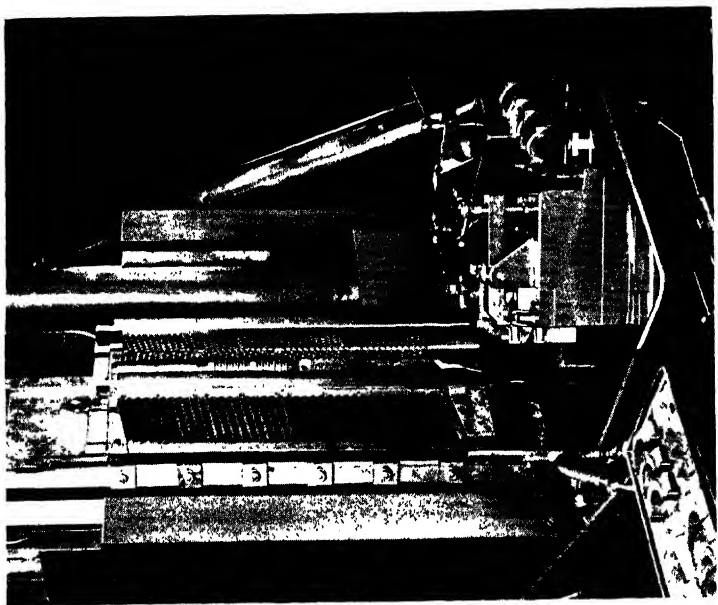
Broaches and Fixtures Designed for the Simultaneous Machining of Various Surfaces on Crankshaft Bearing Caps
